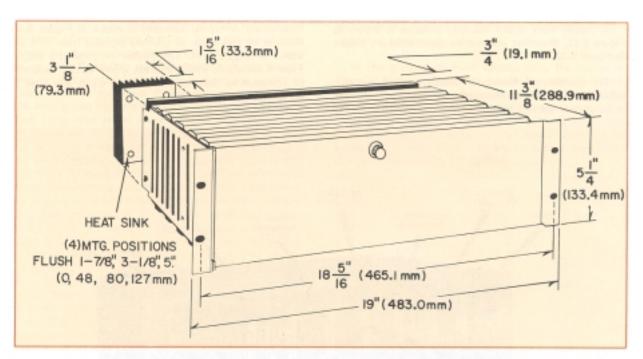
Mounting and outline dimensions for Model 68 Chassis.
